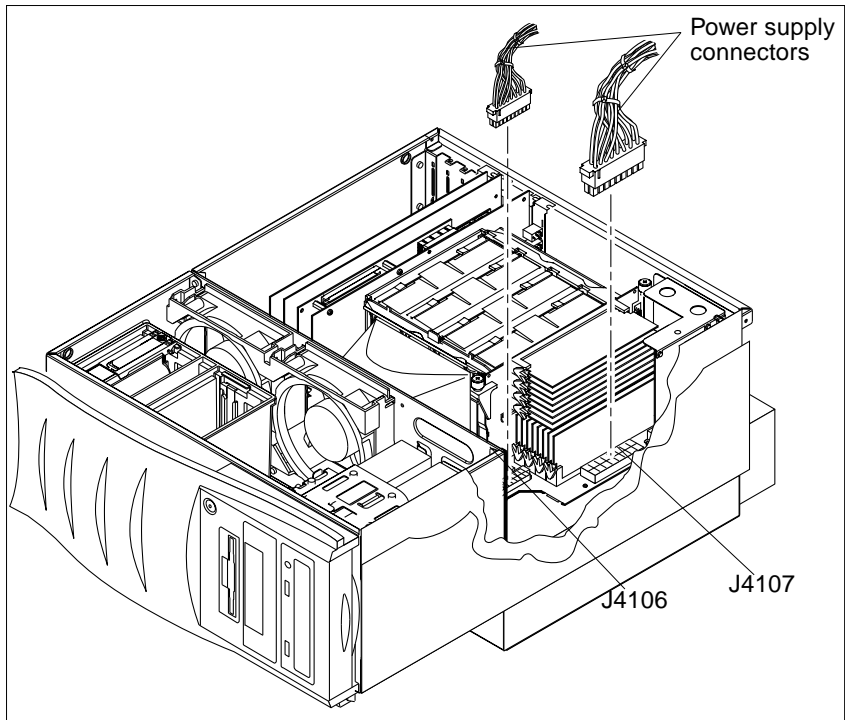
Removing and Replacing the Power Supply Assembly (Sheet 1 of 2)
